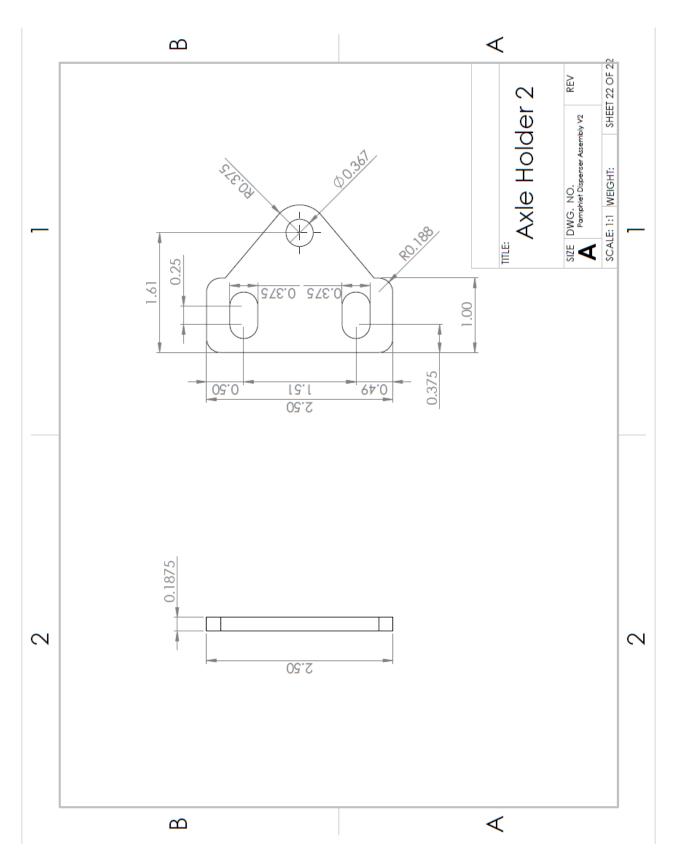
Pamphlet Dispenser Axle Holder 2 Drawing (not to scale)
